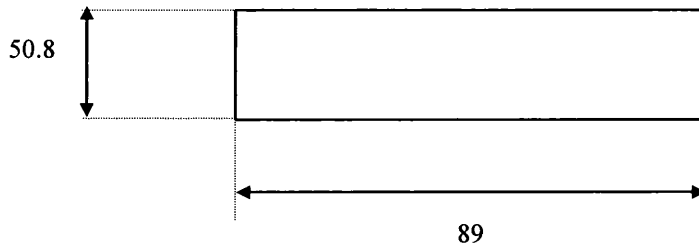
Dimensions of a Gleeble specimen, used to generate modified material under a controlled thermal cycle, to be used for mechanical tests. All dimensions are in mm.
